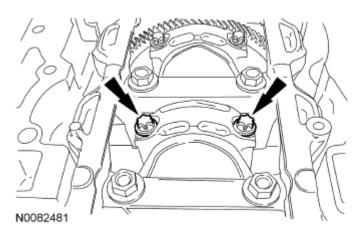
Locating Connecting Rod Cap Bolts Courtesy of FORD MOTOR CO.
